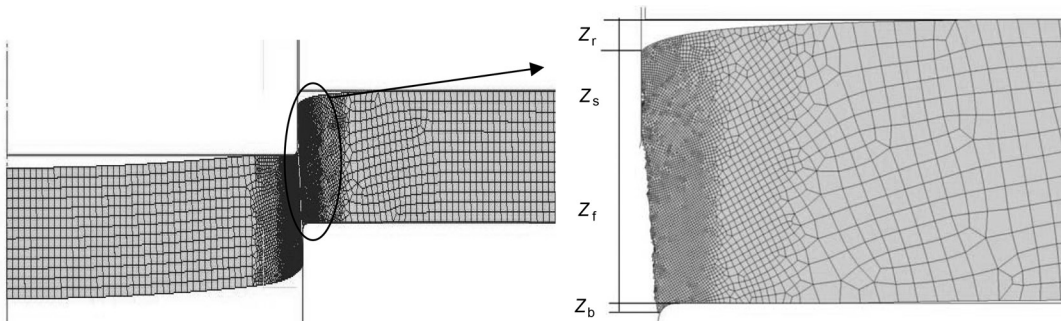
Part at fracture (left) and part edge with different zones indicated (right) (similar to the schematic in Fig. 1.5)
